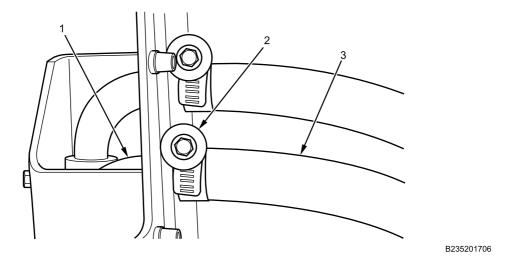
Heater Radiator Outlet Hose Inside LSS Box at Panel.
